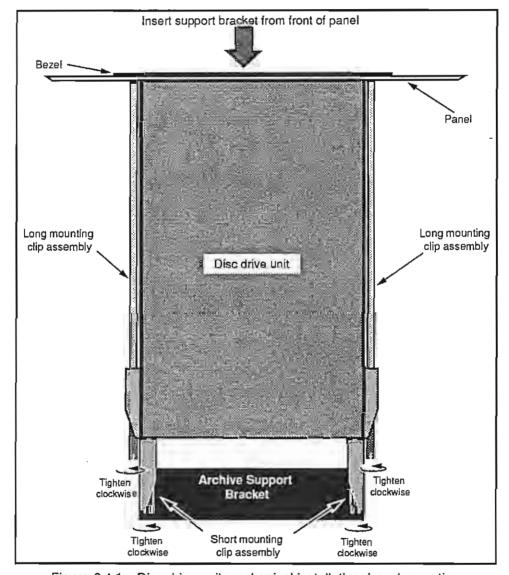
Disc drive unit mechanical installation: bezel mounting
